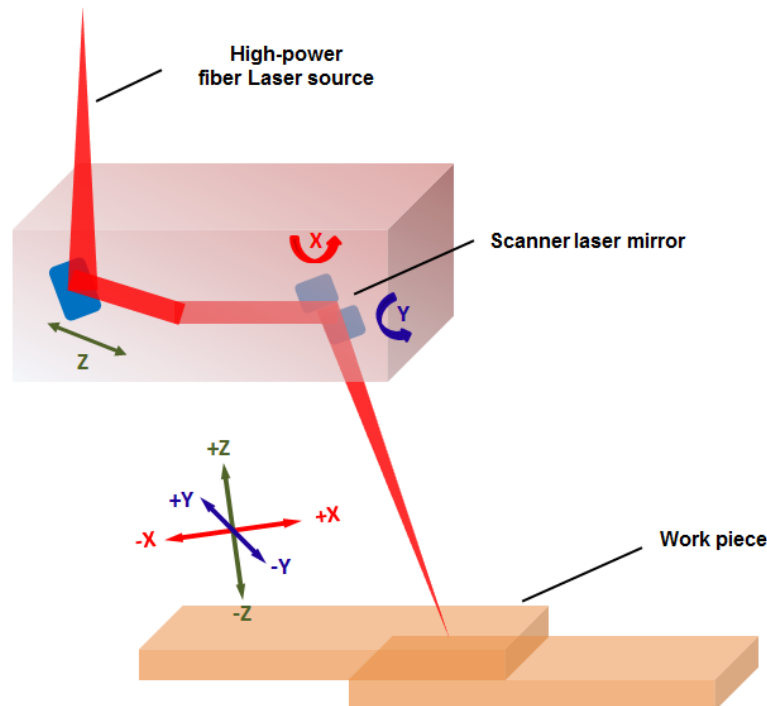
Remote laser welding of 3D scanner
